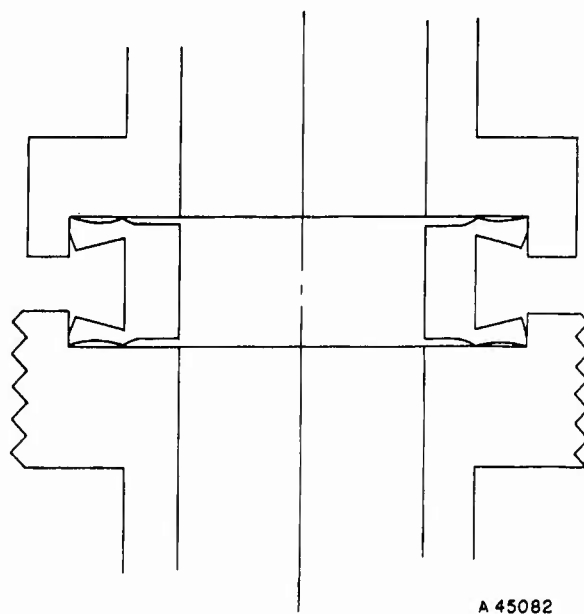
FINAL ASSEMBLED POSITION OF E SEALS
